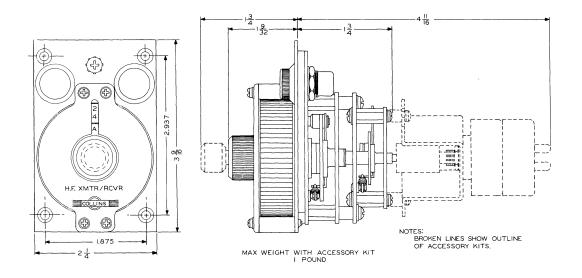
Remote Control Units 614D-1, 614D-2, Outline and Mounting Dimensions
